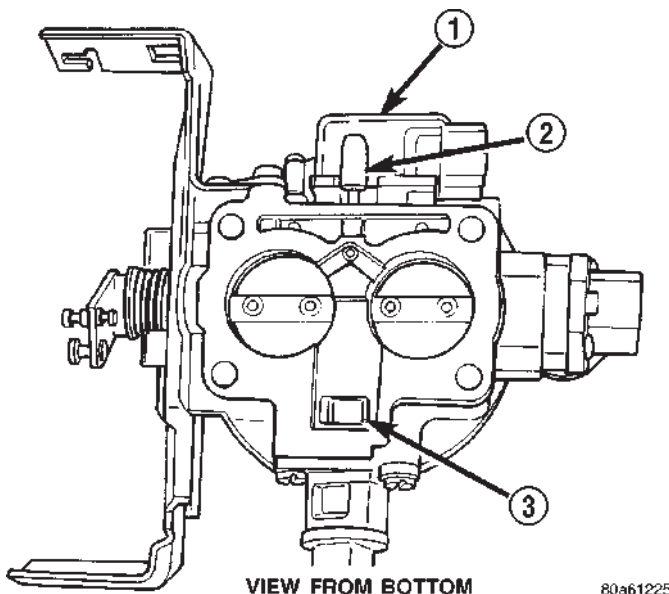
MAP Sensor L-Shaped Rubber Fitting—3.9L/5.2L/5.9L Engines
